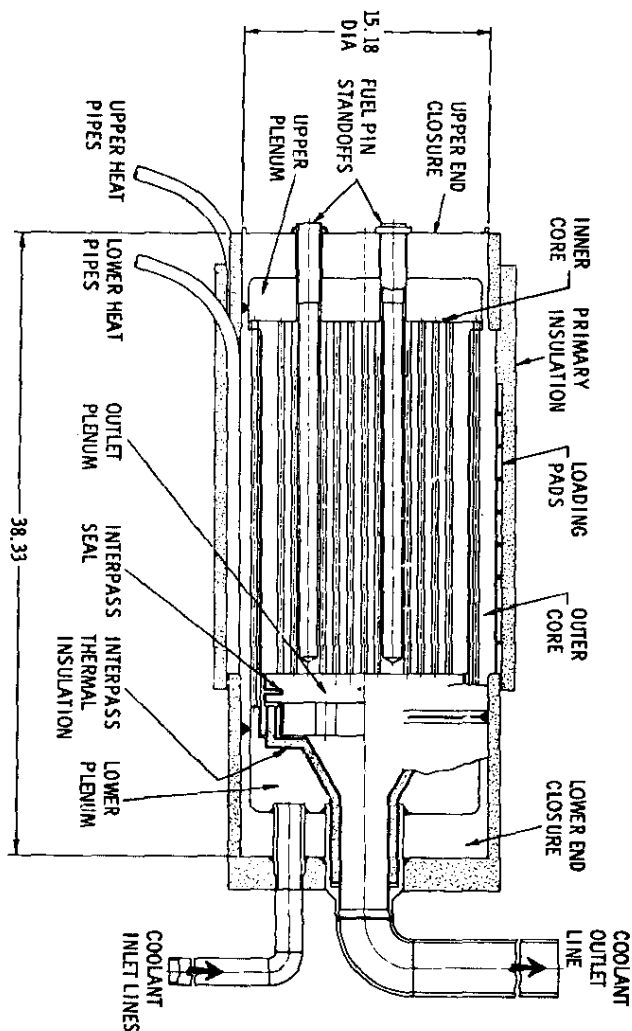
^{60}Co CORE ASSEMBLY FOR WANL UNIT
